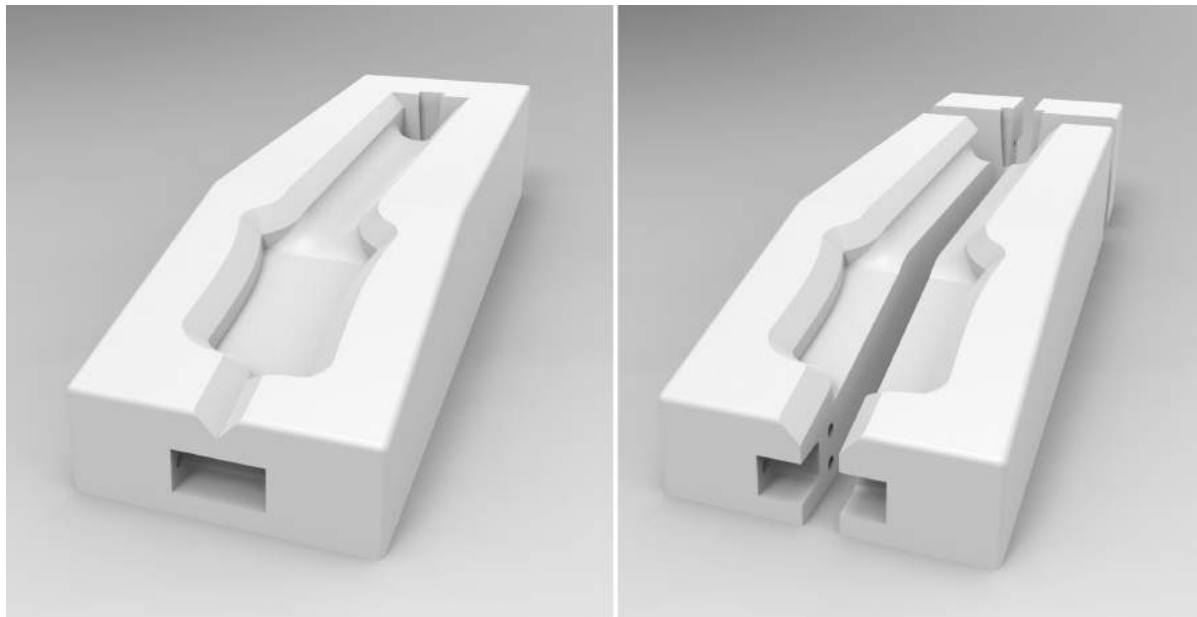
Renderings of the neck mould design. Left: neck mould assembly. Right: exploded view of the neck mould components.
